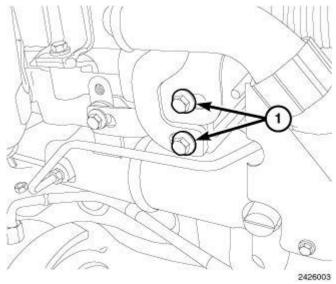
EGR Cooler, O-ring & Forward Coolant Tube Courtesy of CHRYSLER GROUP, LLC
